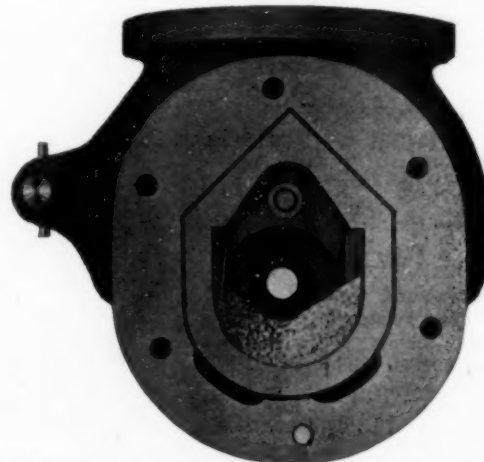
CONSTRUCTION OF THE MIXING CHAMBER. NEW HAVEN SAND BLAST COMPANY'S SAND BLAST.
